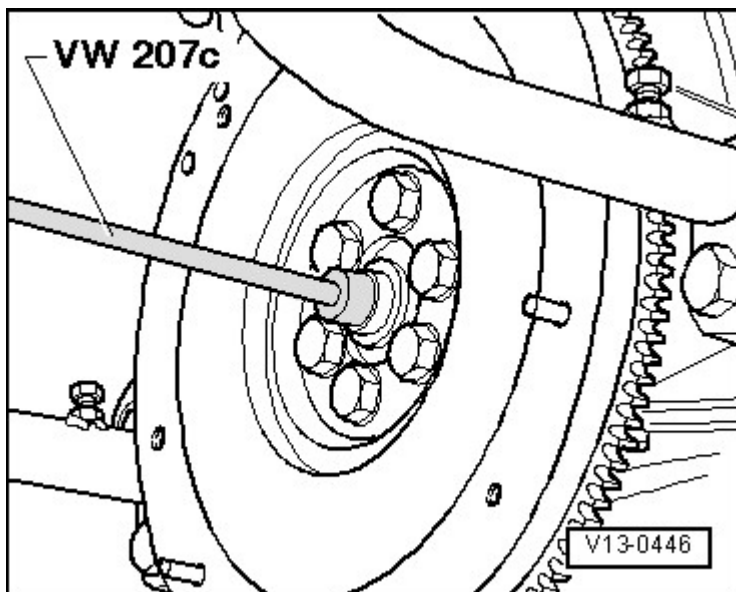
Driving In Needle Bearing Using Drift VW 207 C
